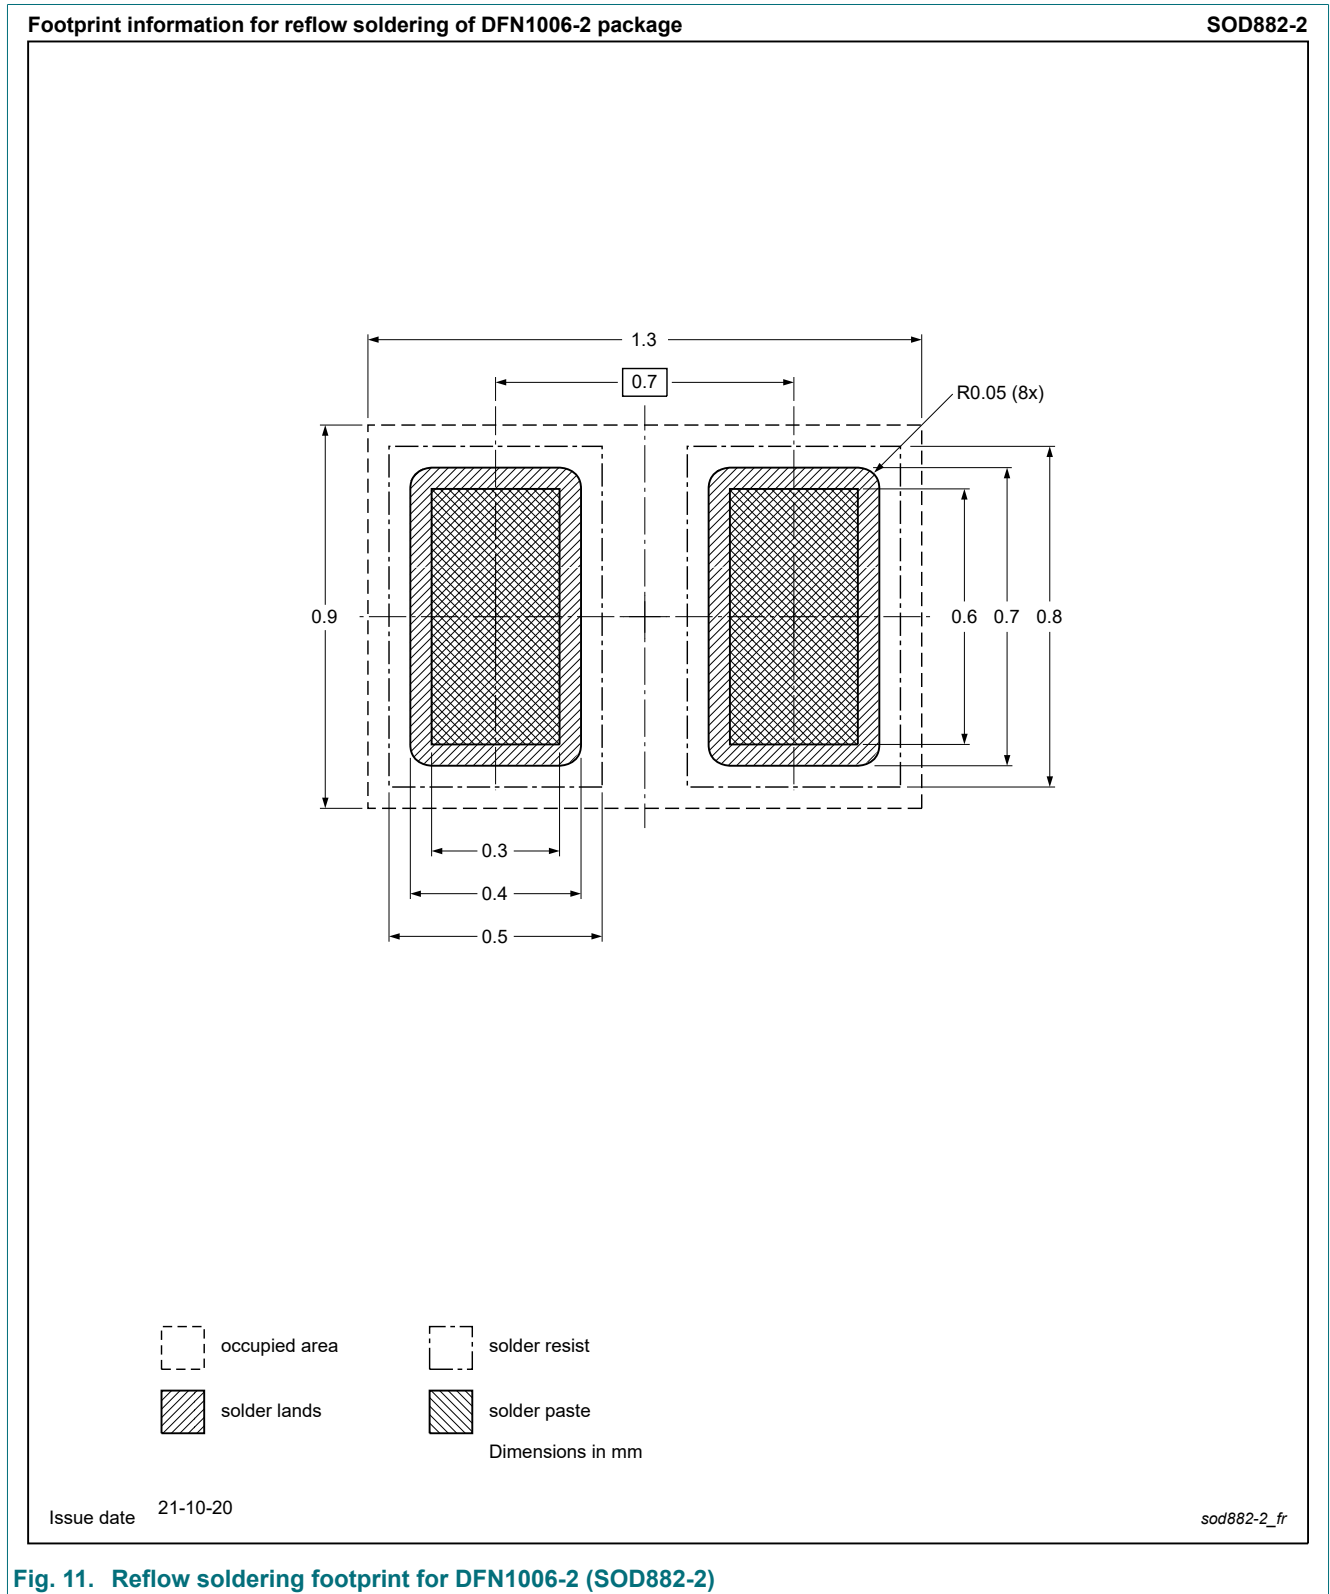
Reflow soldering footprint for DFN1006-2 (SOD882-2)
